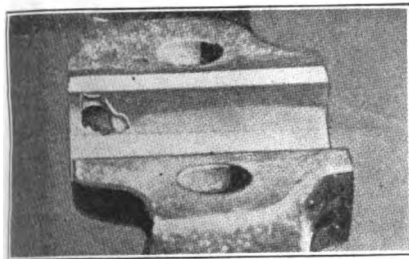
THE BEARINGS SHOULD BE FREE FROM DEFECTS
